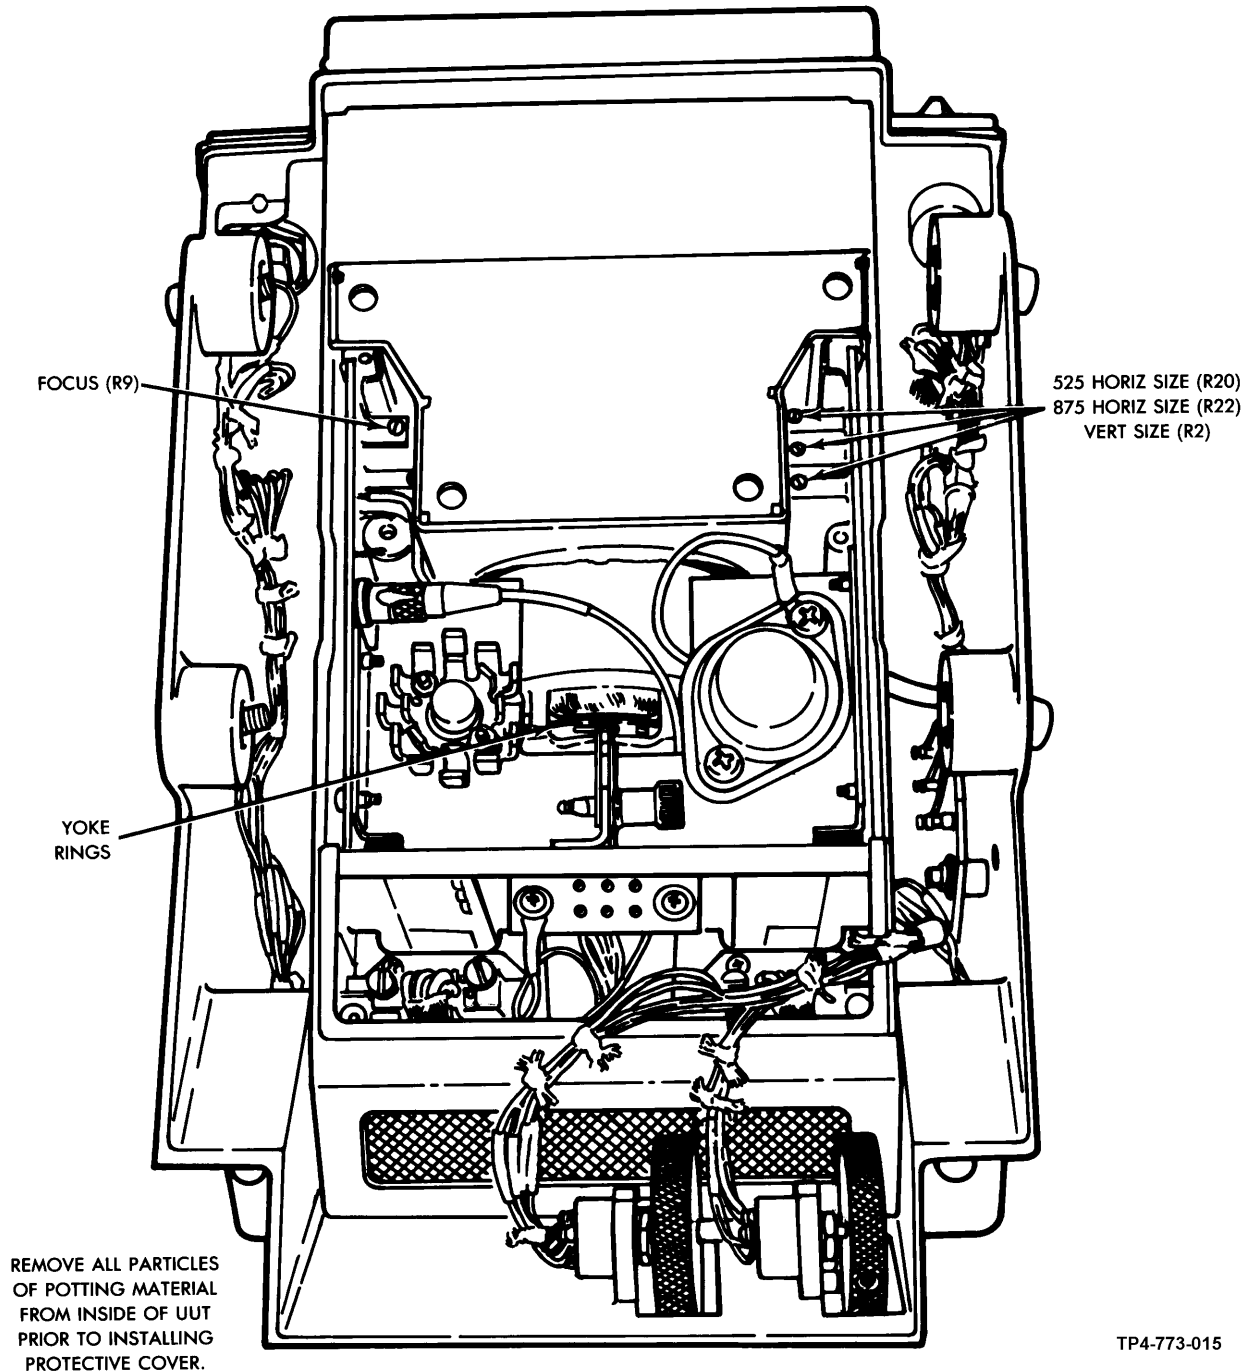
Control Panel Assembly Adjustment Potentiometer Locations
